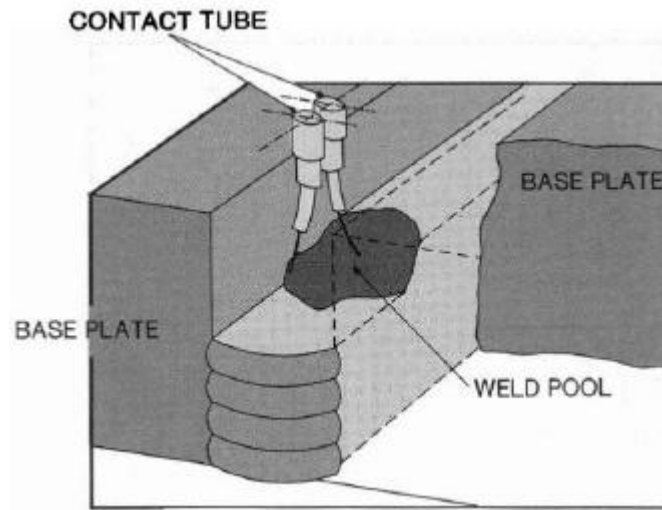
Tandem welding with adjustable electrode spacing (Lassaline, 1989)
